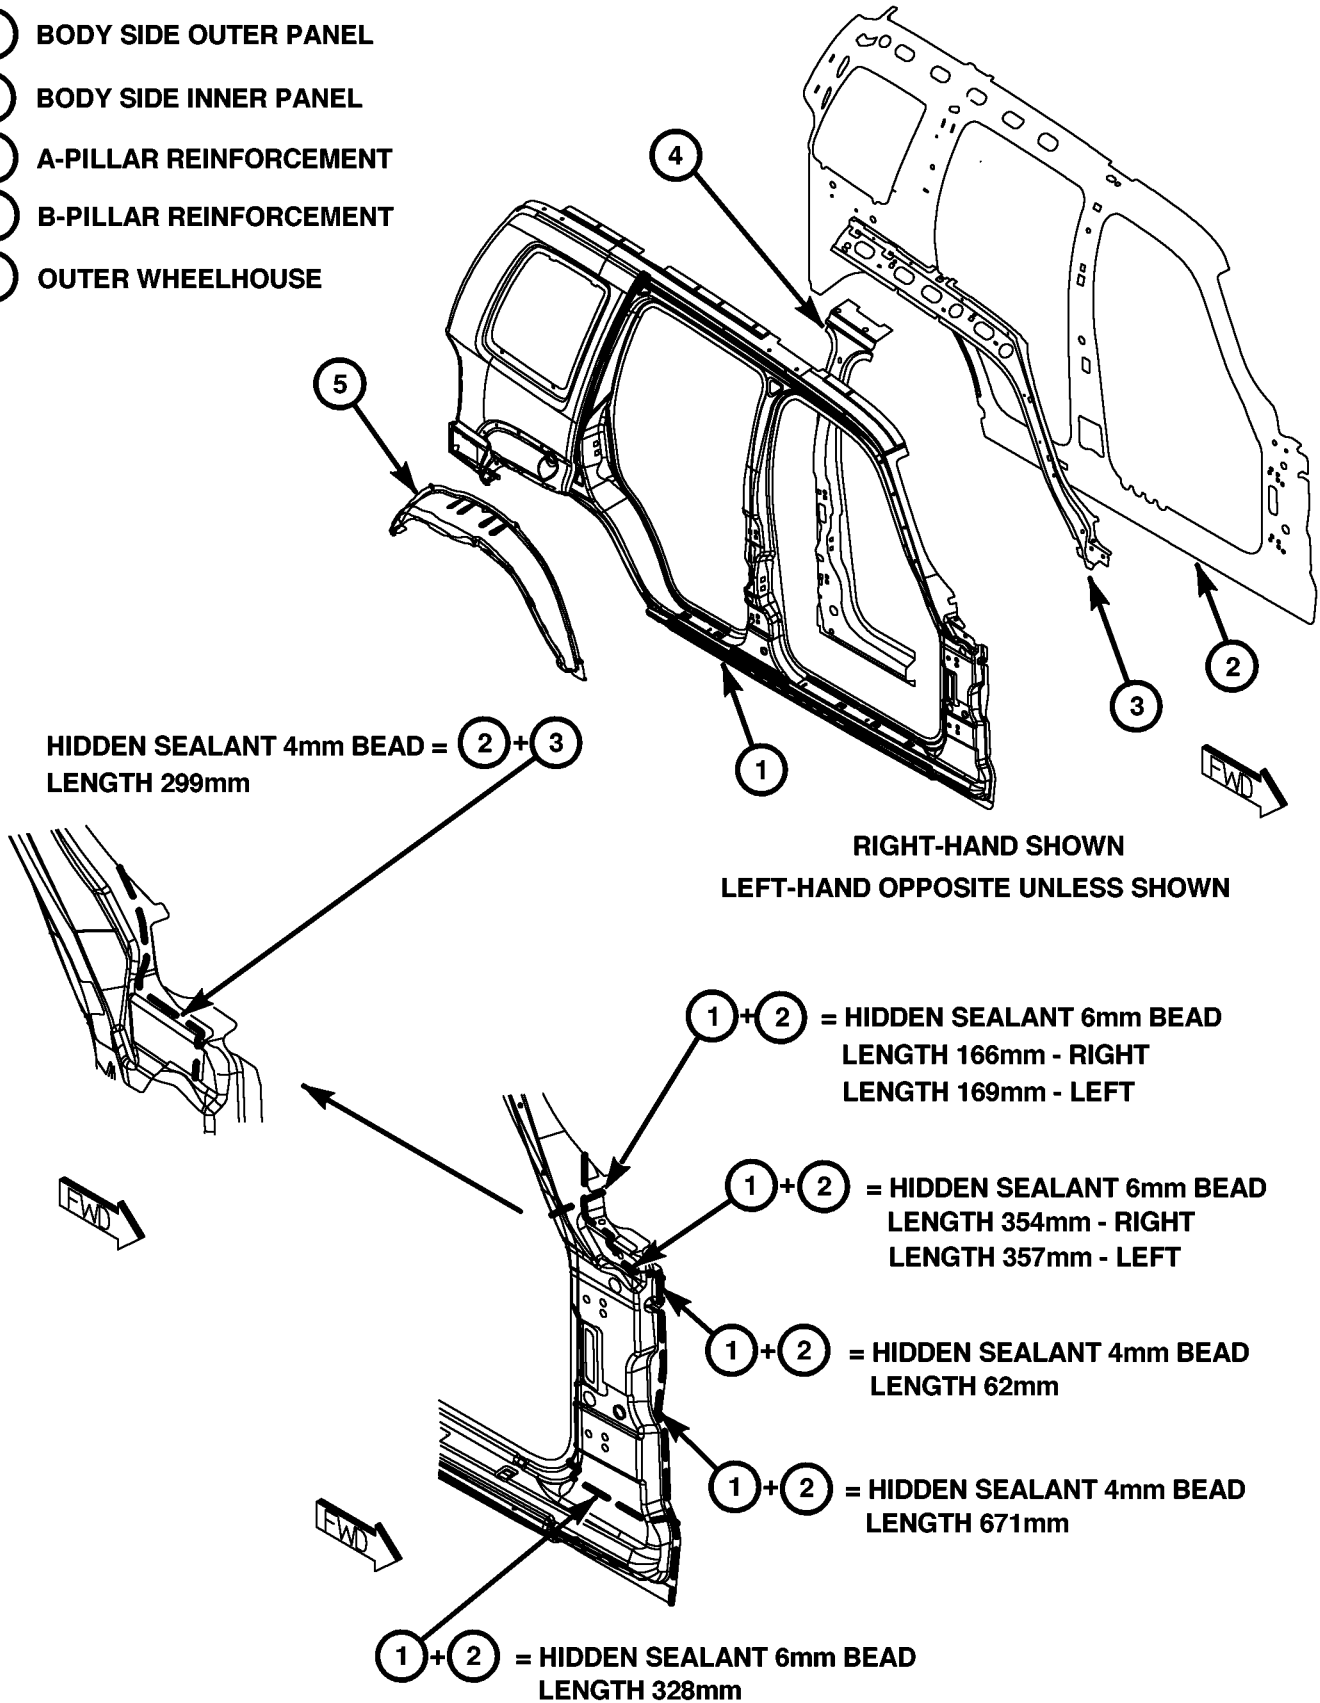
BODY SIDE PANEL ASSEMBLIES
